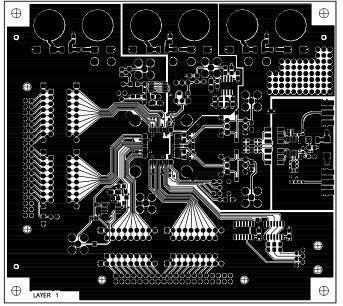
AD9773 Evaluation Board Layout, Layer One (Top)
